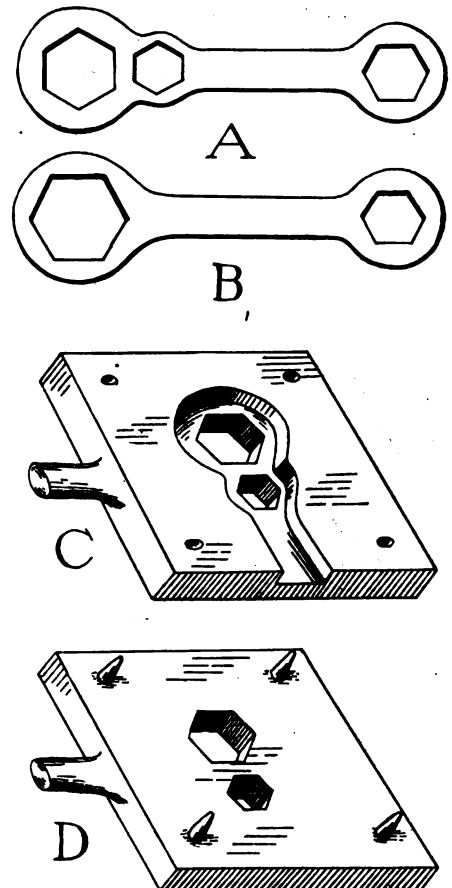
THE FINAL PROCESS OF PUNCHING THE HOLES IN THE WRENCHES, AND TOOLS USED.
